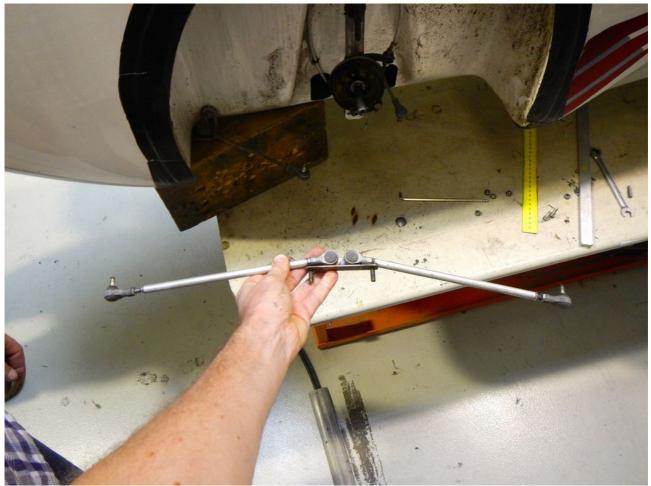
This is the anchor plate and M6 rods with aluminium tube around it, together with four ball joints. The rods are too short for the new steering plates.
